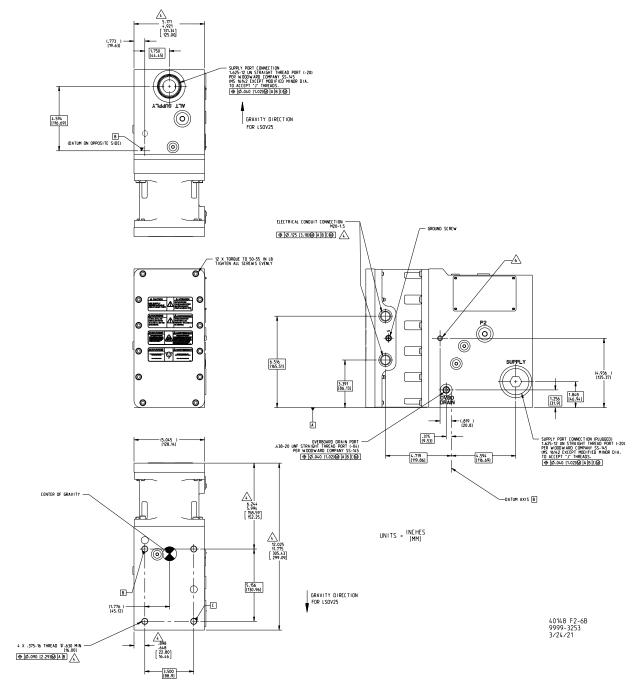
Outline Drawing LSOV25, M20-1.5 Conduit
